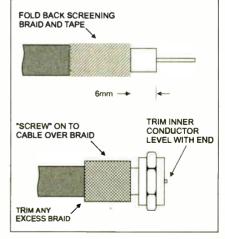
Preparing and fitting the F-type plug to the "free" end of the cable
